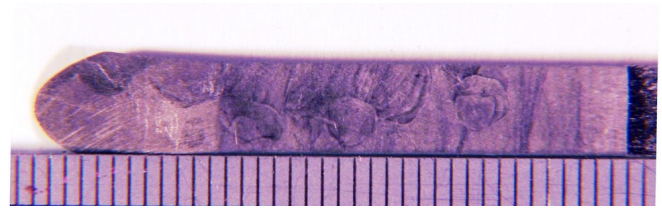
Photograph showing weld passes in test specimen.
